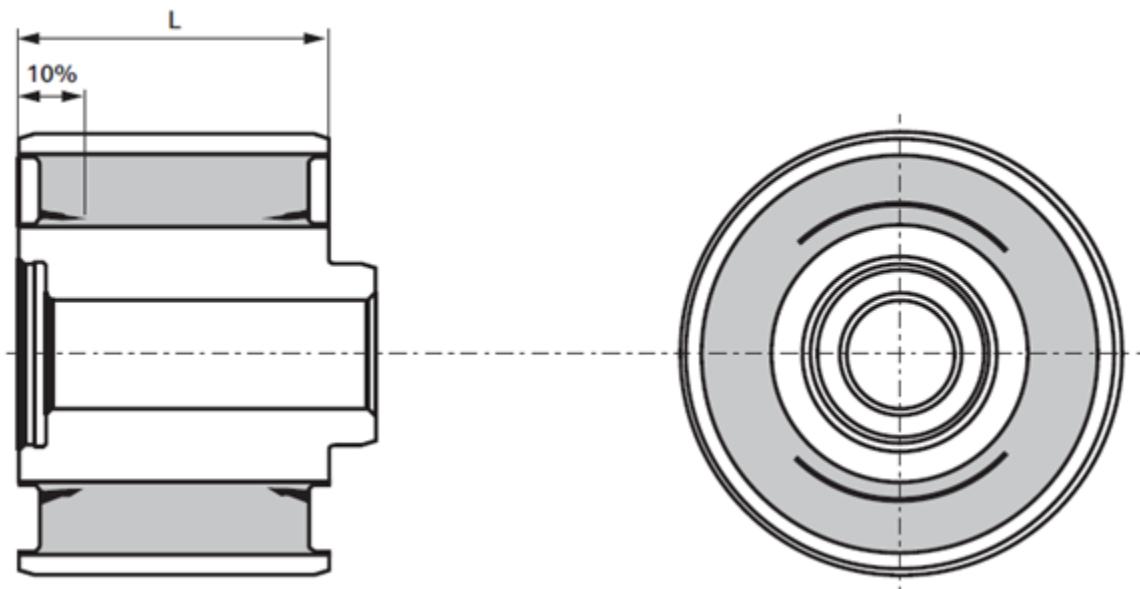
Example of Cracks that Require Shorter Inspection Intervals
